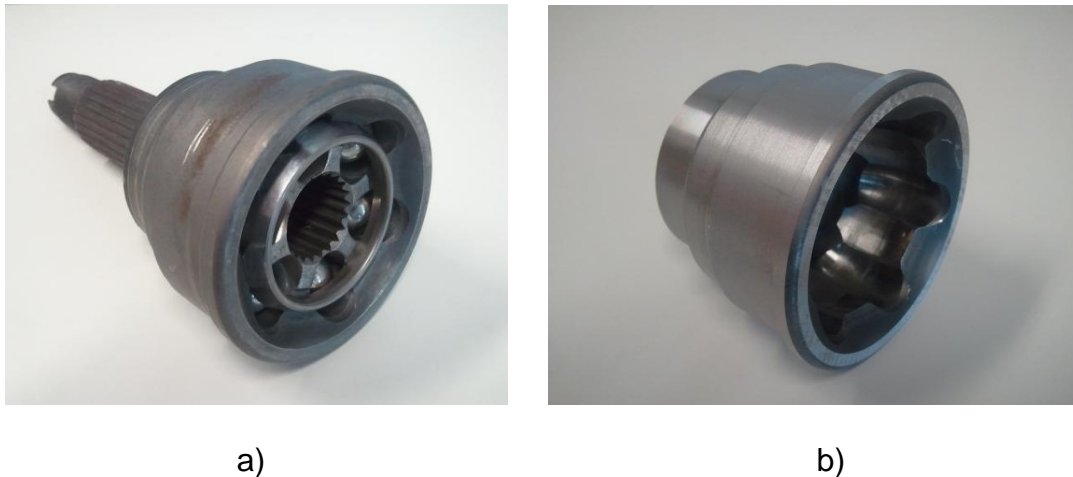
a) initial CV joint, b) CV joint machined to suit disc drive mechanism bearing housing
